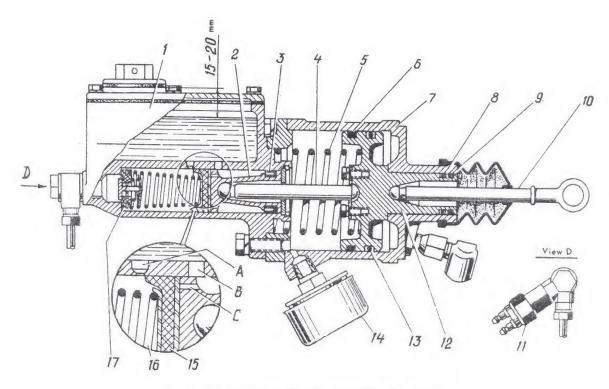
BRAKE CONTROL MASTER CYLINDER AND BOOSTER
